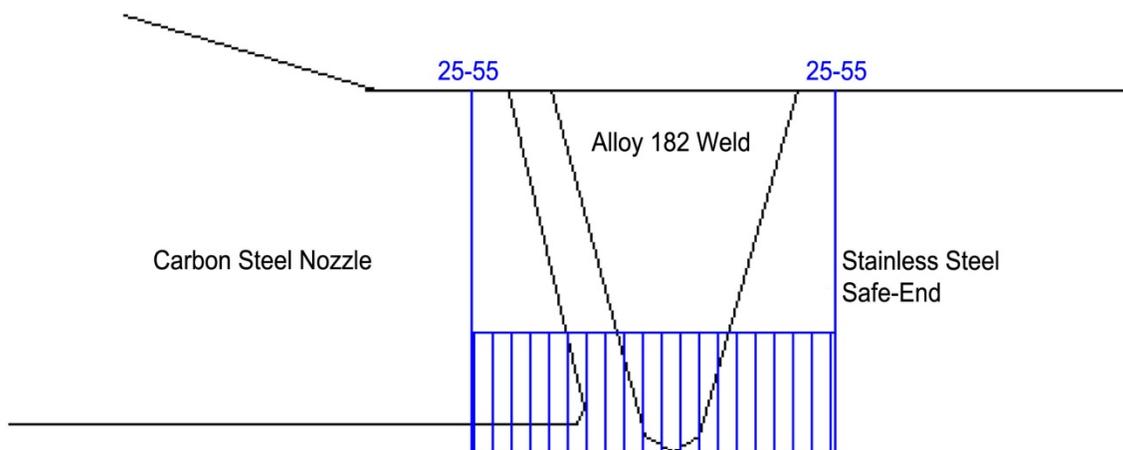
RPV Cold Leg Nozzle Weld Circumferential Scan CRV Coverage
